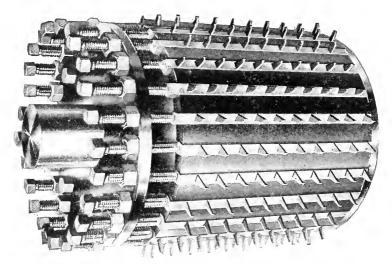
View of One of the Four Drums of the Greenlee Perforating Machine.
